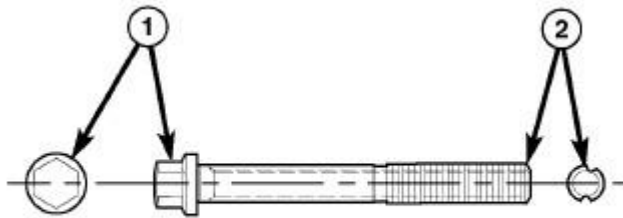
WHEEL ALIGNMENT ADJUSTMENT BOLT
